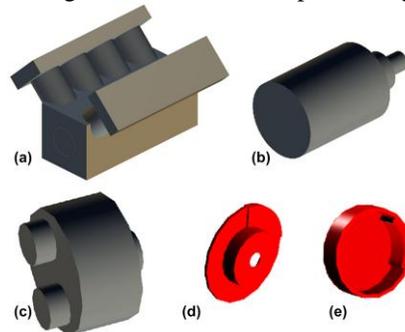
Power source assembly abstractions (a) V8 IC engine, (b) electric motor/generator, and (c) hydraulic motor/pump, (d) disc brake, and (e) drum brake.
